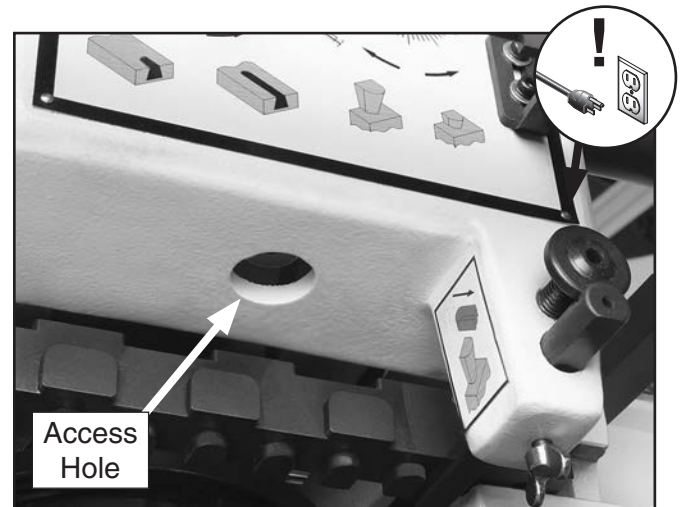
Dust plug removed to see bottom of cutter spindle for belt removal.
